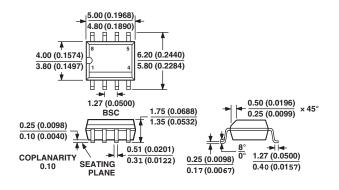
8-Lead Standard Small Outline Package [SOIC]
